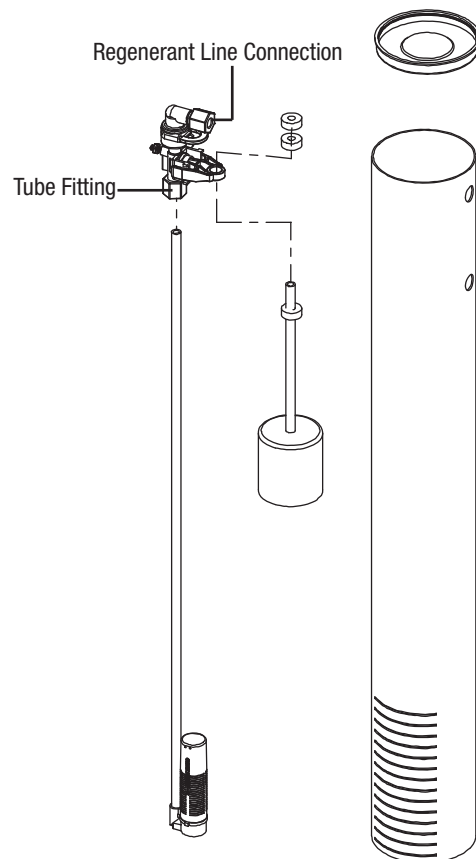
Salt Tank Safety Brine Valve and Brine Well Assembly
